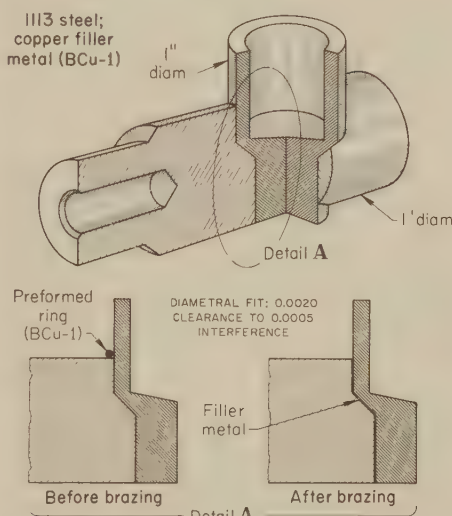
Leak-off-valve assembly that was changed from a brass casting to a two-piece steel brazement, to avoid leakage due to porosity in the casting (Example 573)
